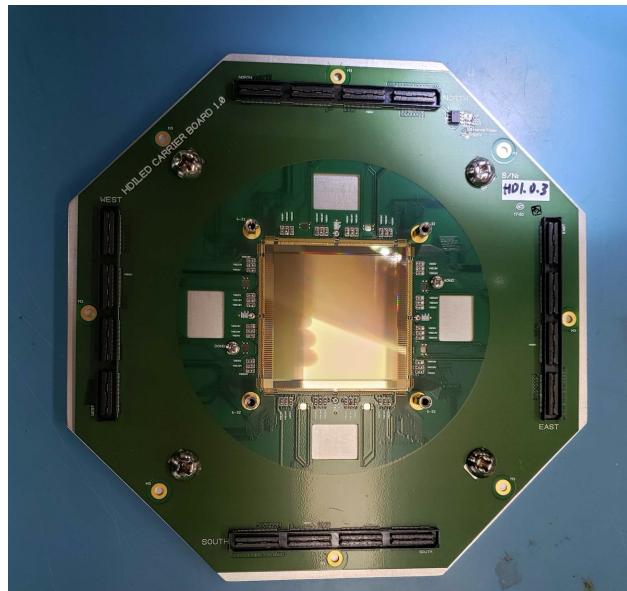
Picture captured of carrier board populated with all the board components; including the HDILED RIIC only array wire-bonded.
